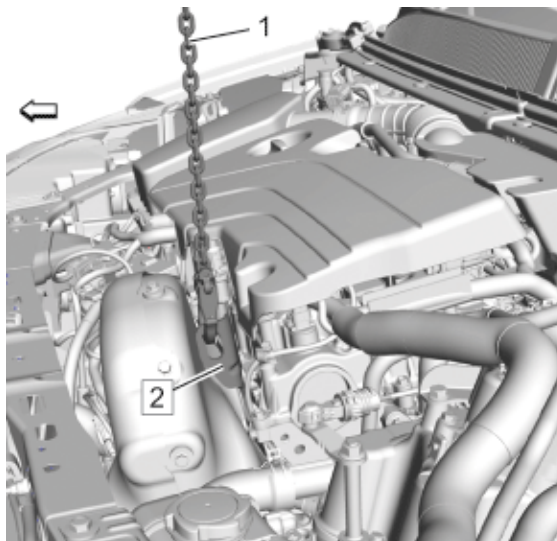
Engine Lifting Chain And Engine Lift Rear Bracket
